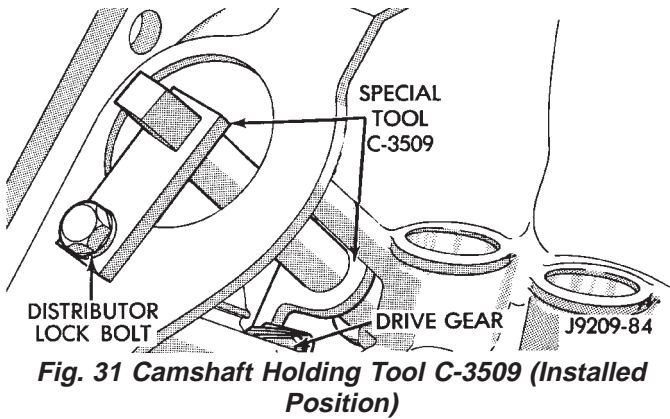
Camshaft Holding Tool C-3509 (Installed Position)
